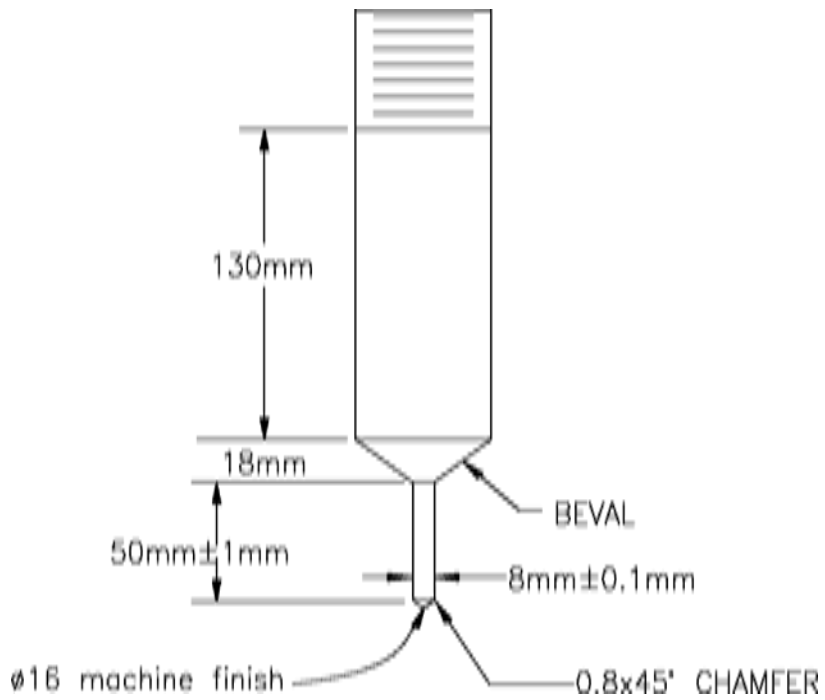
TEST PROBE DETAIL (NOT TO SCALE)
